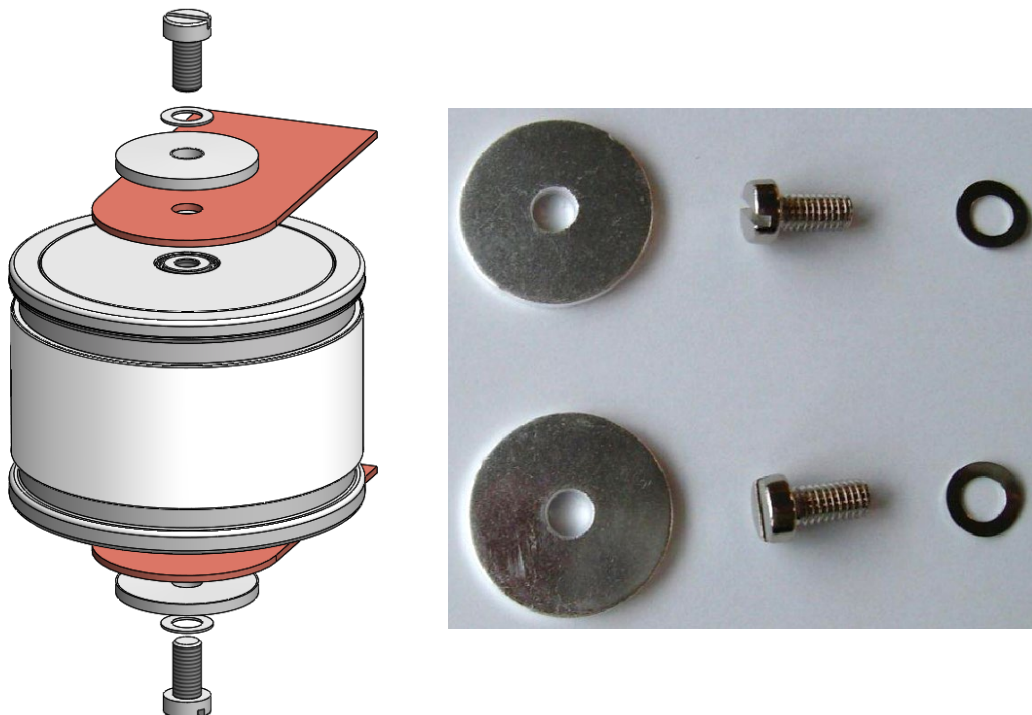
Schematic view of mounting of CFMN-B geometry with mounting kit 058-071
